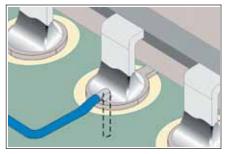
Acceptable Wire soldered into plated-through hole, component side.
